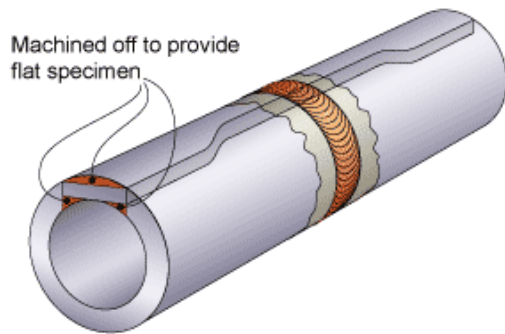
Flat Tensile Specimen cut out from Tube (TWI, 2004)
